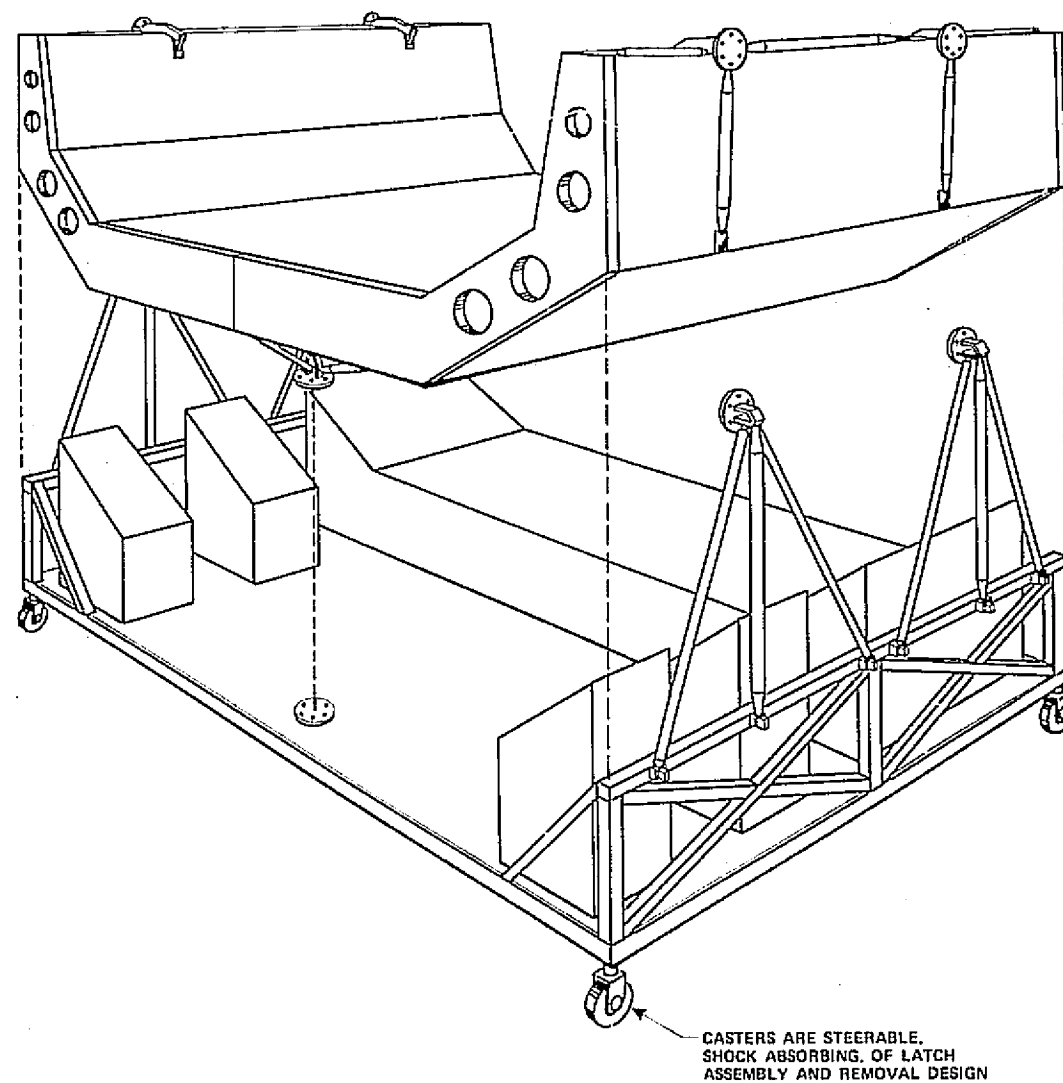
Concept of AMPS pallet handling frame.
